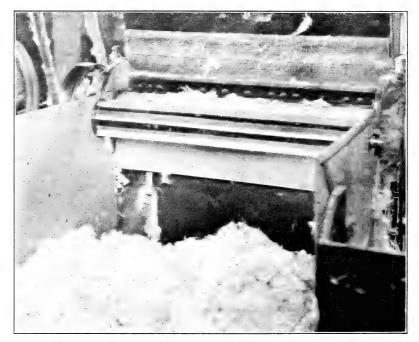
Close-up View of the Flapper-Roller Attachment with the Screen Removed
